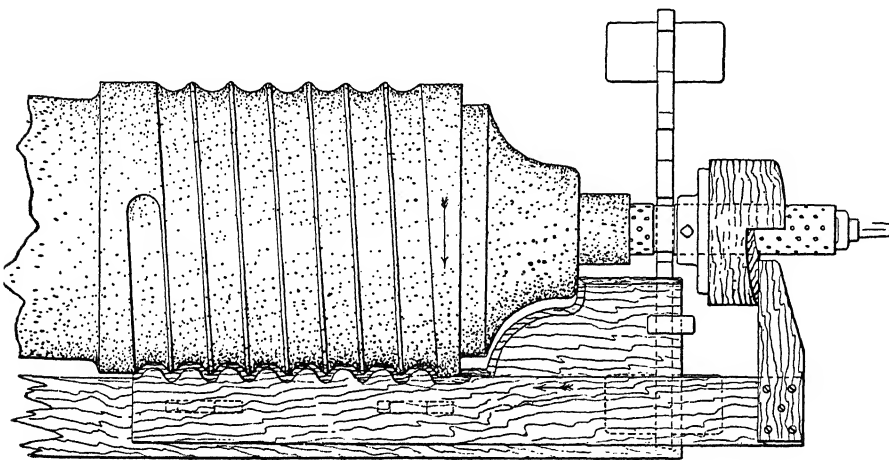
The Use of a Templet Screw to control the Striking Board for the Loam Pattern of a Spiral Crane Drum
